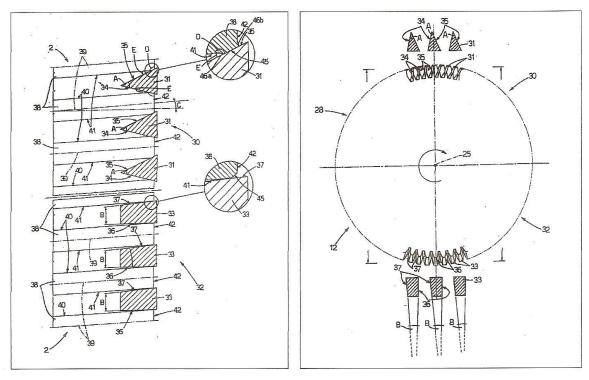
Schematic drawing of chamfer-roller patented by Samputensili
